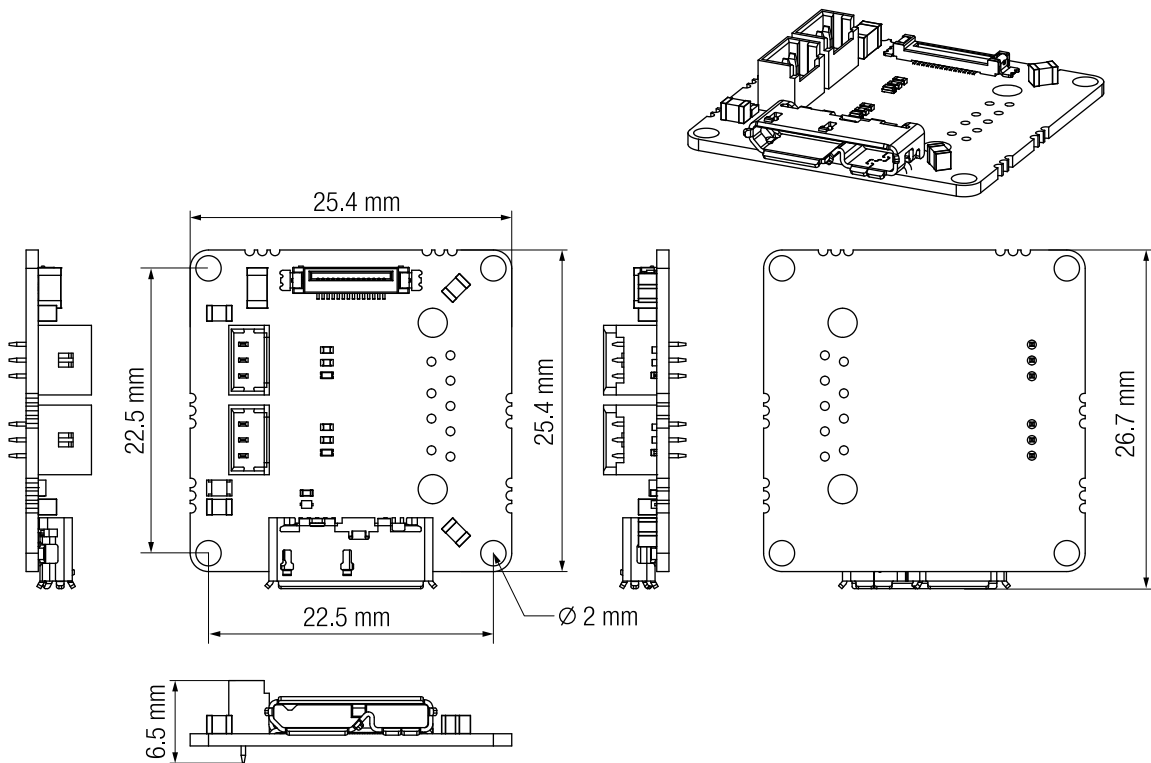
ADPT-U3-UC-U3-UB dimensional drawing
